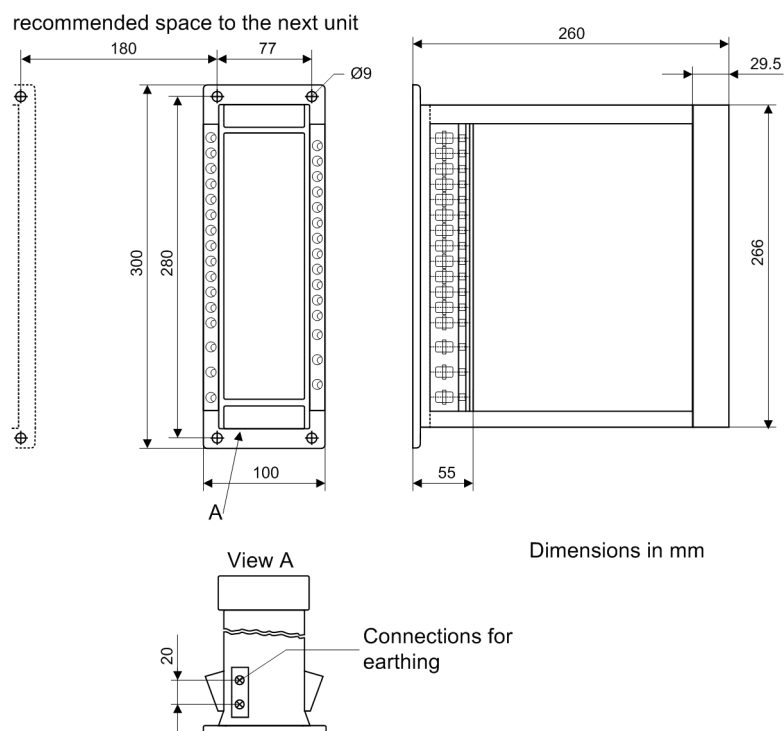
Dimensions of Series Device 7XT7100-0BA00 for Panel Surface Mounting where:
